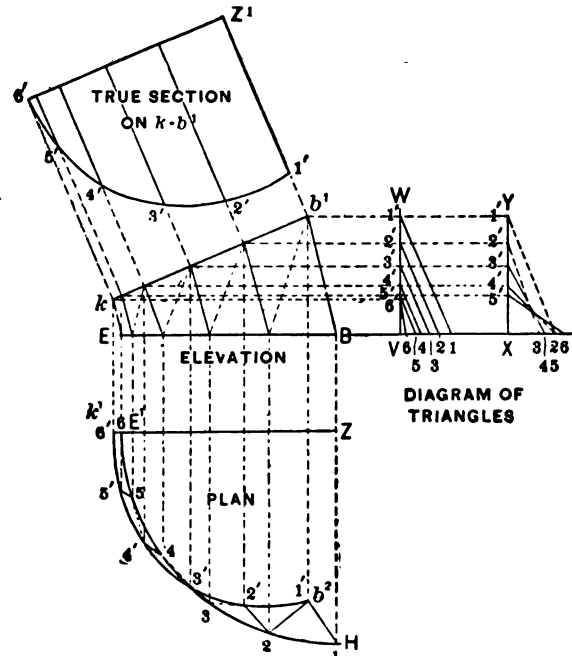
Elevation, Plan and Section of First Piece,  $E k b^1 B$ , in Left Side, Duplicated from Fig. 89, Showing Method of Triangulation.
